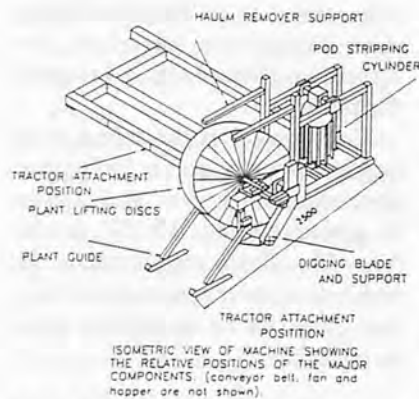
An isometric view of the proposed groundnut harvesting machine.
